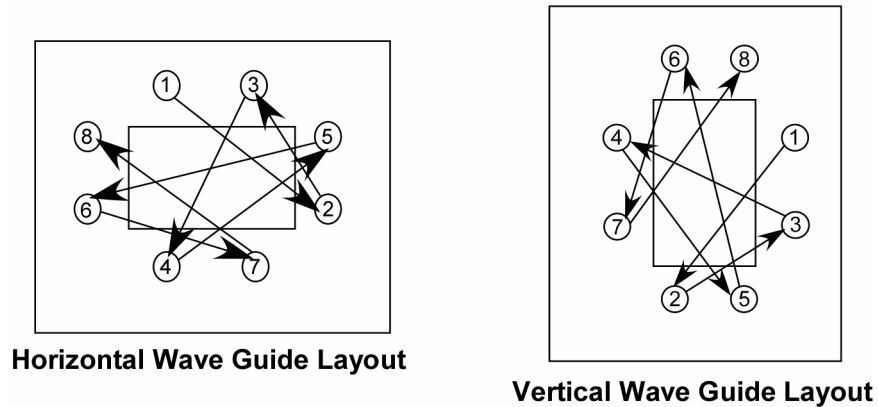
, Typical 8 Screw Mounting Flange Tightening Sequence
